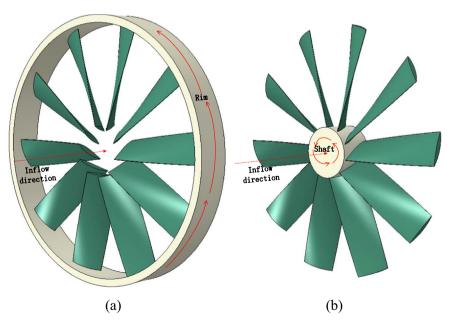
(a) The rim driven thruster (RDT); (b) The traditional shaft driven propeller (SDP).
